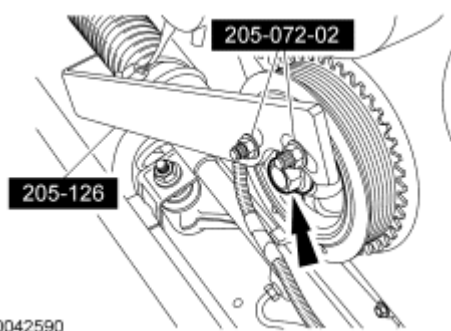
Assembling Special Tools (205-126 And 205-072-02)
